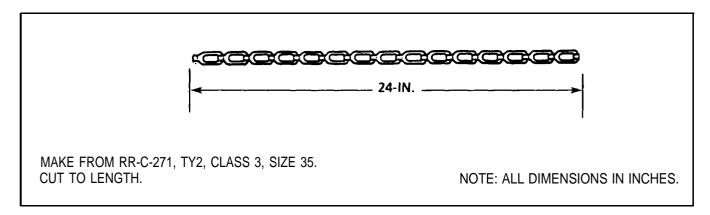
Chain, Weldless, Loading Plan (13218EO025-43).
